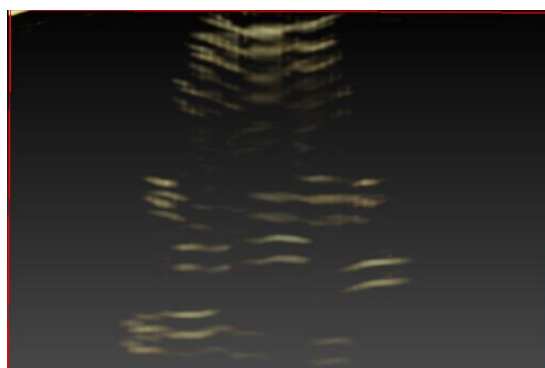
Image of impact damage area in specimens with three cooling conditions obtained by ultrasonic flaw detection.
